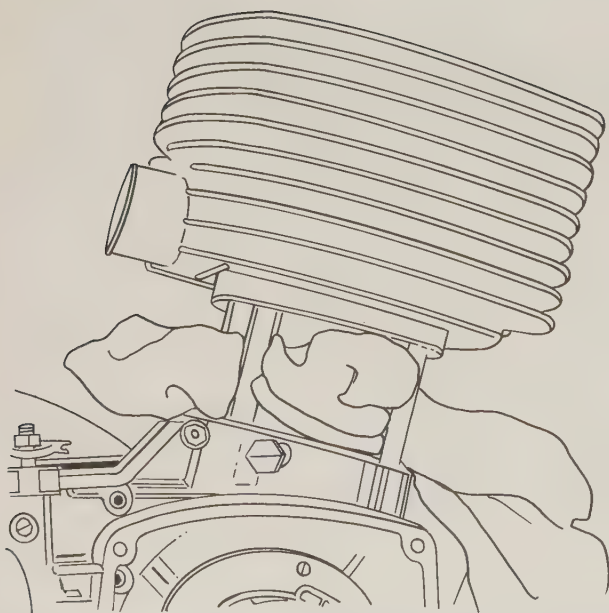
Place a clean cloth around the connecting rod and the crankcase opening to prevent dirt from entering the crankcase.
